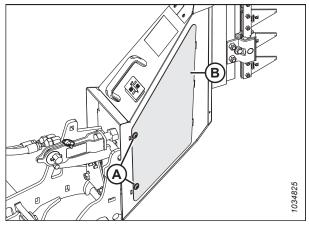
Vertical Knife Access Cover – Right Side Shown, Left Side Opposite
